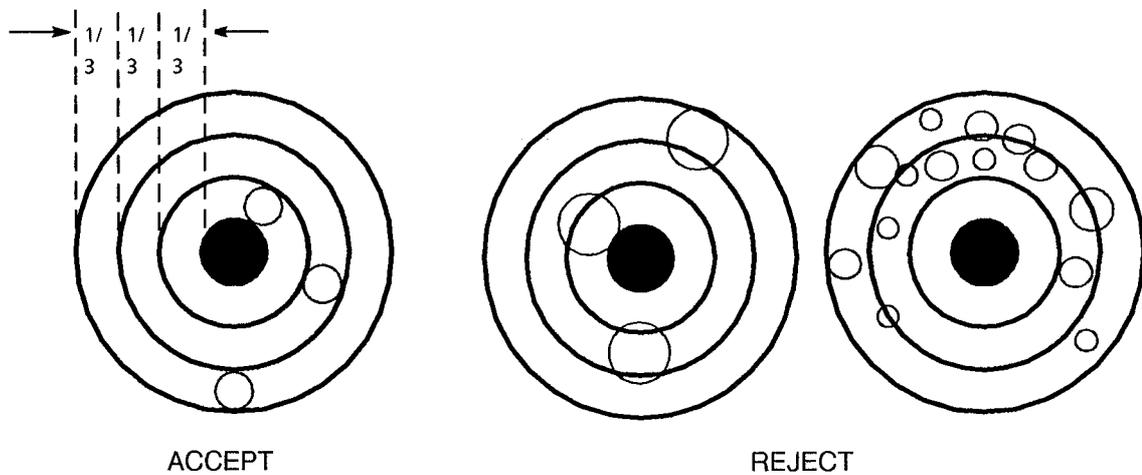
FIGURE X VII - GLASS-TO-METAL SEAL CRACKS AND CHIP-OUTS
